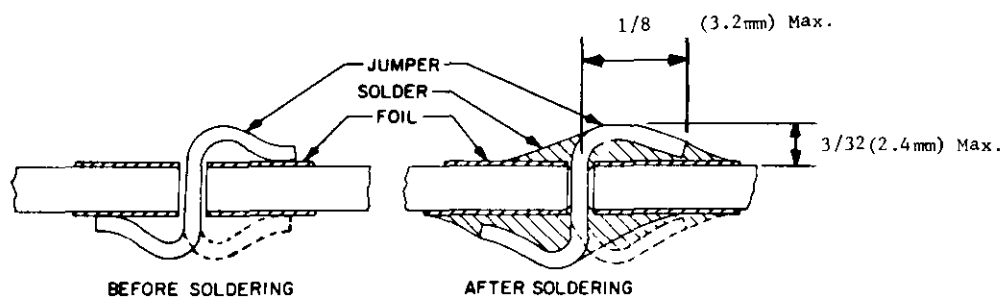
PLATED-THROUGH HOLE IS COMPLETELY FILLED WITH SOLDER.
